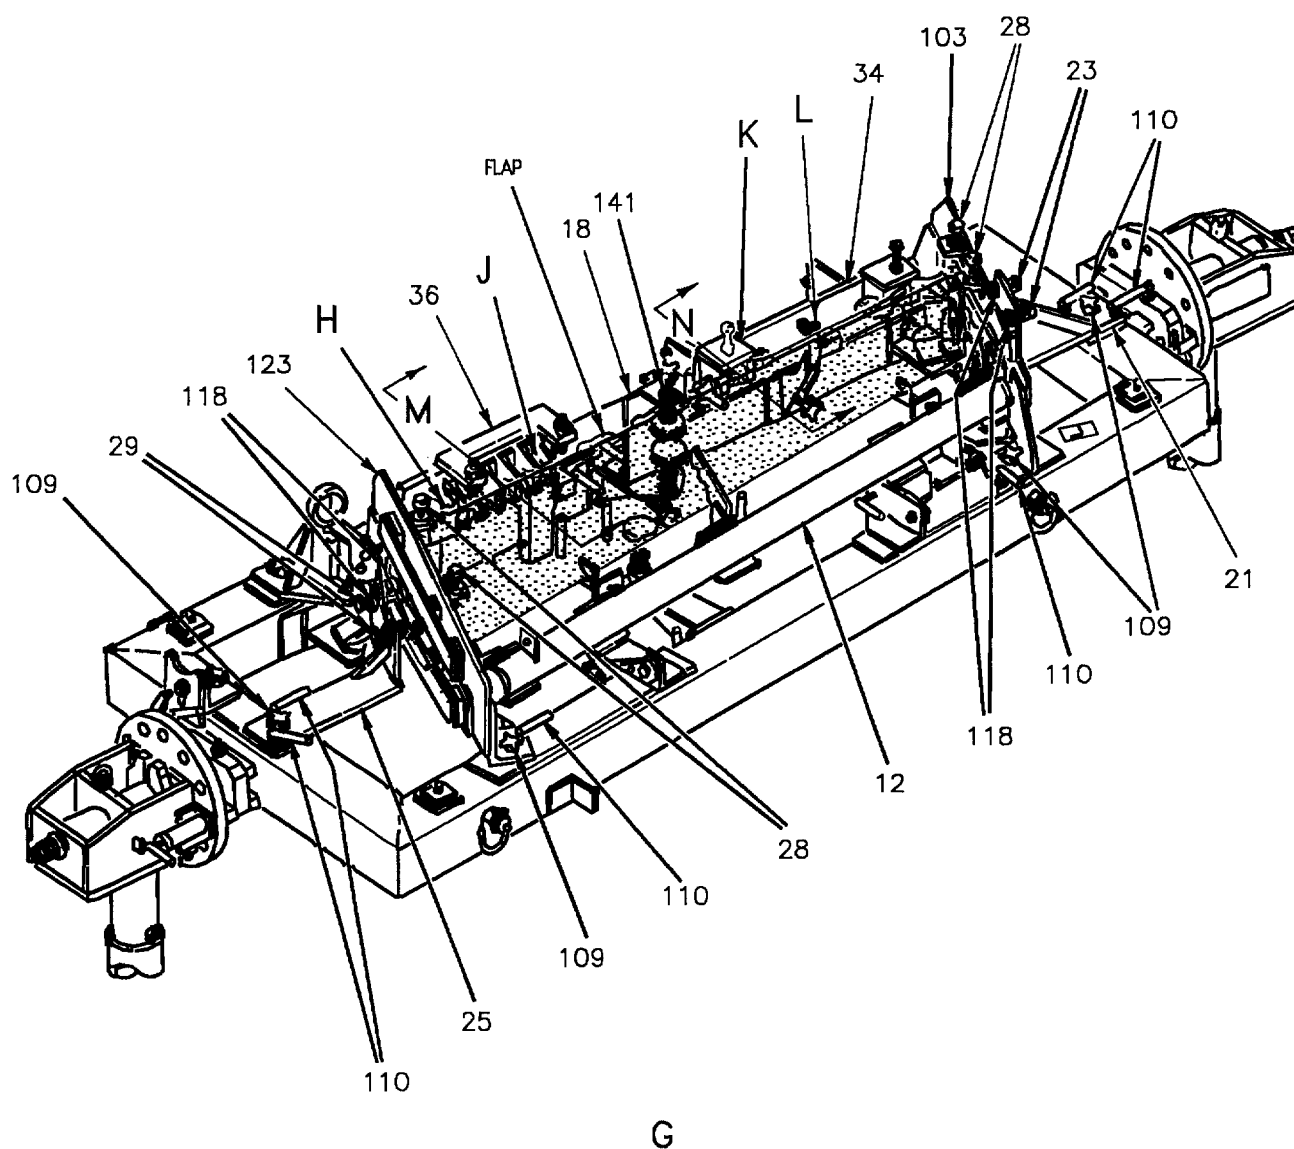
Installation of Flap with Damaged Bushings into Fixture (Sheet 4)
